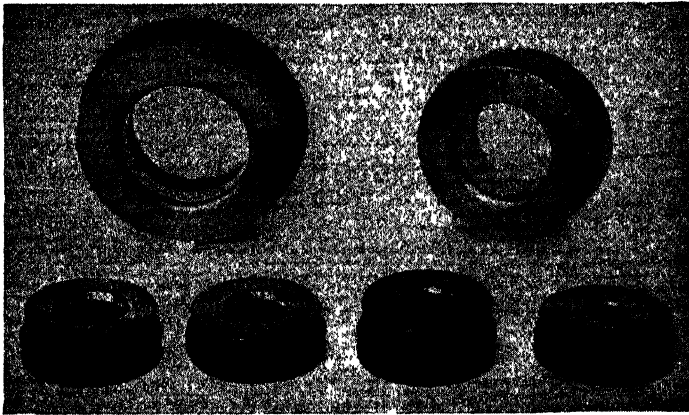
Draw rings. Such die parts need particularly careful treatment in furnace and quench. The smaller rings are for latch-housing shells.
